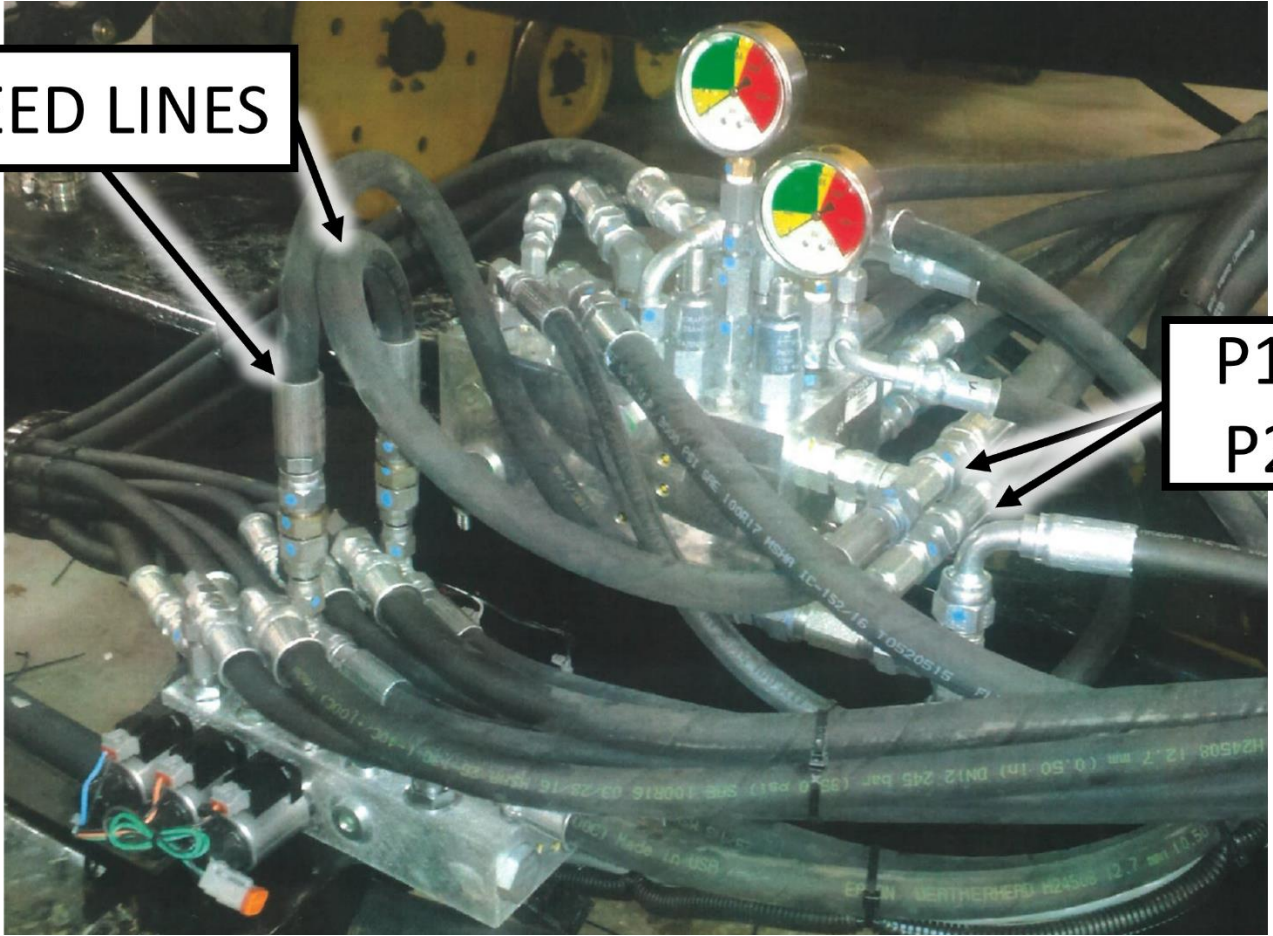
Assembled Lift Assist block with Main Down Pressure Block, front view
